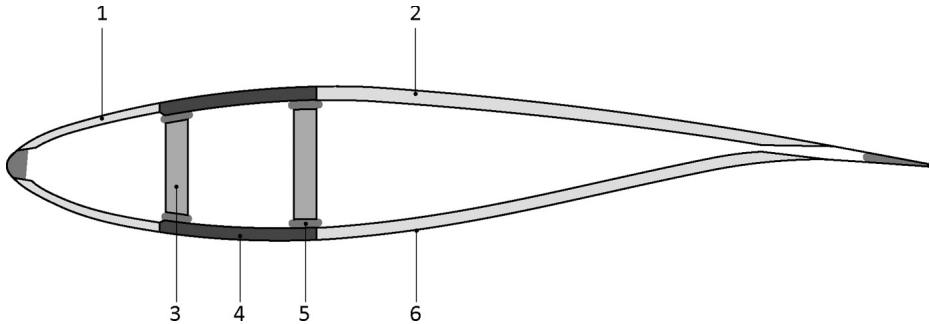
Sections in a blade cross-section: (1) leading edge shells, (2) trailing edge shells, (3) shear webs, (4) spar caps, (5) adhesive bonds, and (6) coating [24]. Reprint from Resources, Conservation and Recycling: 167, Jelle Joustra et al., Structural reuse of high end composite product: A design case study on wind turbine blades, 2021, with permission from Elsevier.
